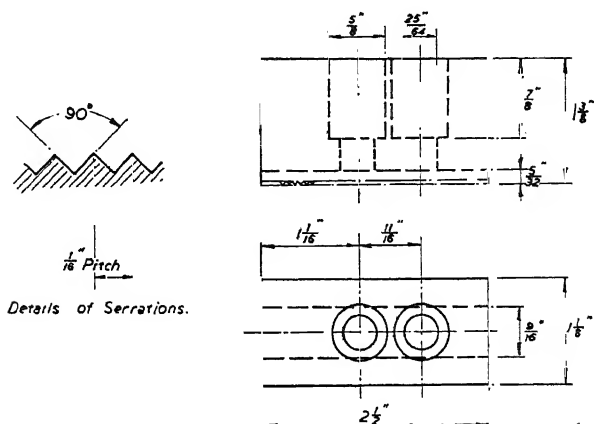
Soft jaw blanks for Tudor 3-jaw chuck (with replaceable jaws). 9 in.
